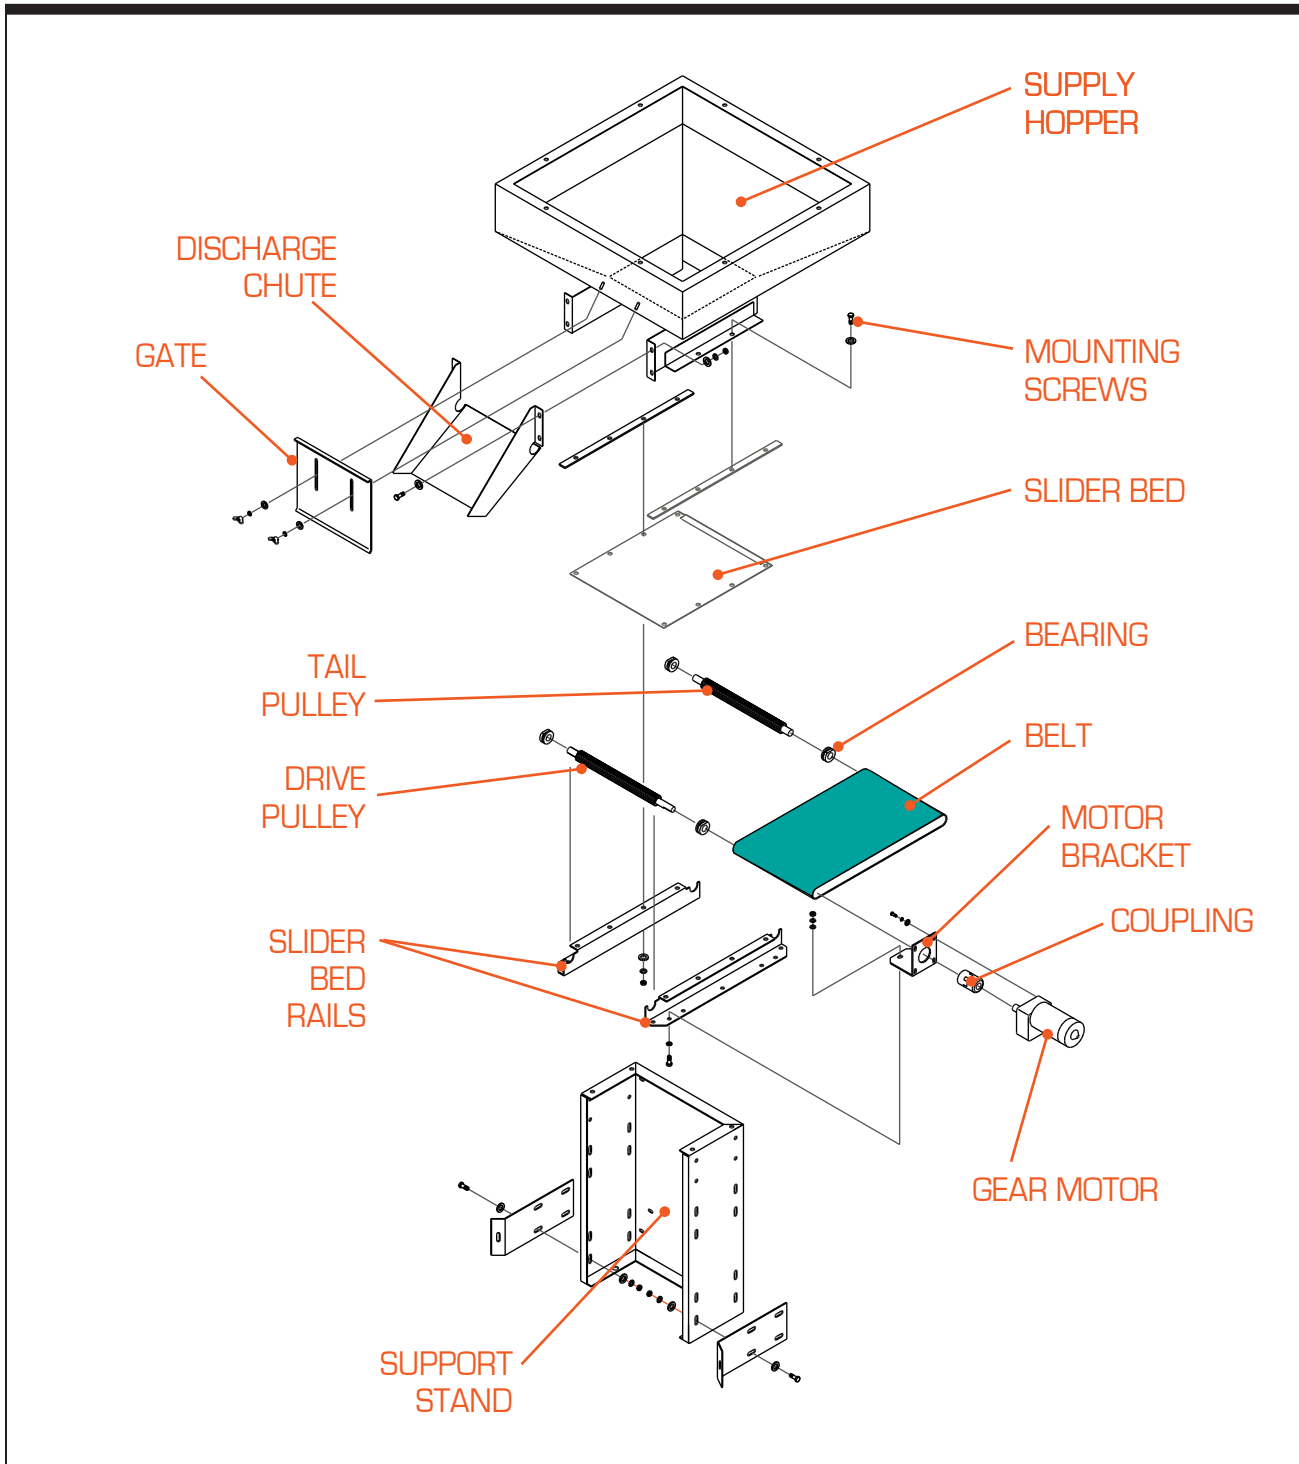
LB-03 Overhead Prefeeder (DC Motor) - Exploded View
